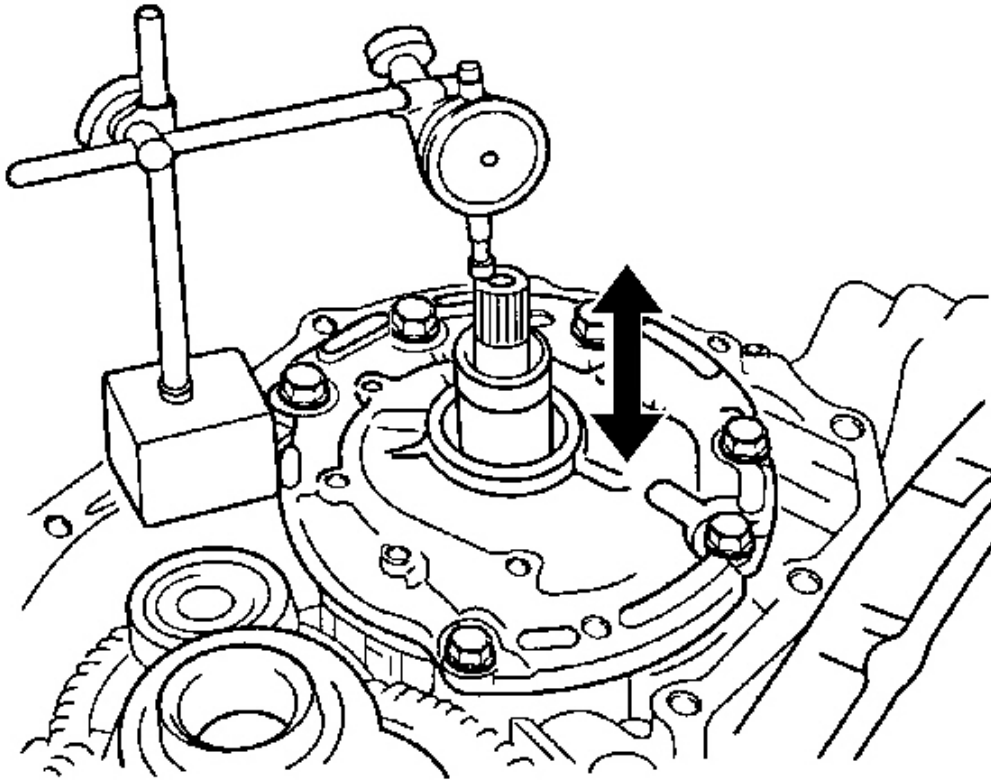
Measuring The Input Shaft End Play Using A Dial Indicator
